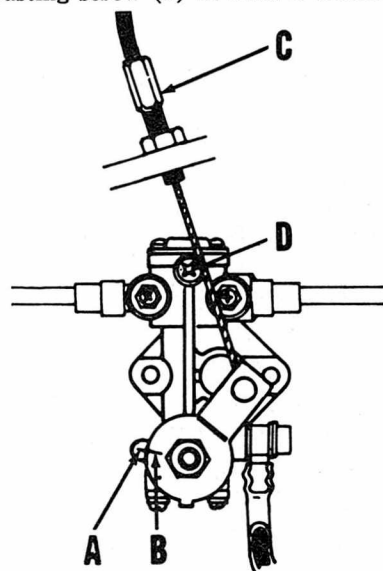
With throttle wide open, marks (A&B) will align on correctly adjusted oil pump. Loosen bleeder screw (D) to remove air from system.
